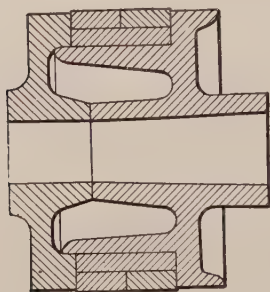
Body and follower type of piston equipped with three-ring metal packing.
